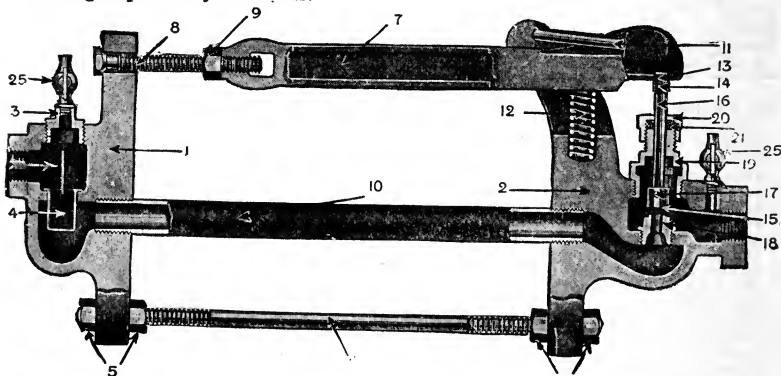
,936.—Kieley *cantilever expansion* steam and air trap. *The parts are:* 1, inlet head; 2, outlet head; 3, plug; 4, strainer basket; 5, nuts; 6, lower rod; 7, lever; 8, lever bolt; 9, locknut; 10, expansion tube; 11, lever pin; 12, spring; 13, clamp; 14, disc; 15, cotter pin; 16, disc stem; 17, rivet; 18, seat; 19, bonnet; 20, packing nut; 21, packing; 22, plate; 23, gasket; 24, cap screws; 25, air cocks.
